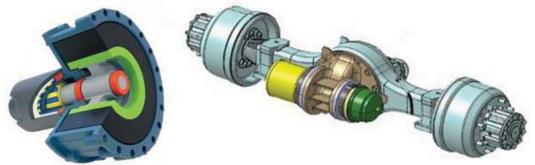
Left Ricardo's flywheel, right Kinergy flywheel system integrated into a rear axle assembly [6]
